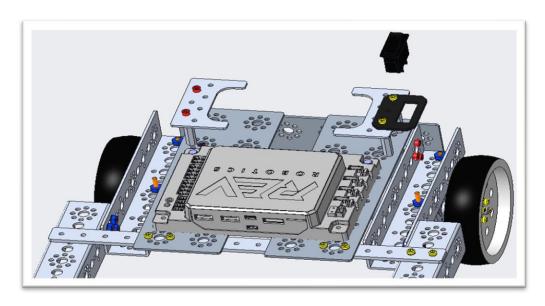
Unassembled view (The wires attached to the switch are not shown in this image)
